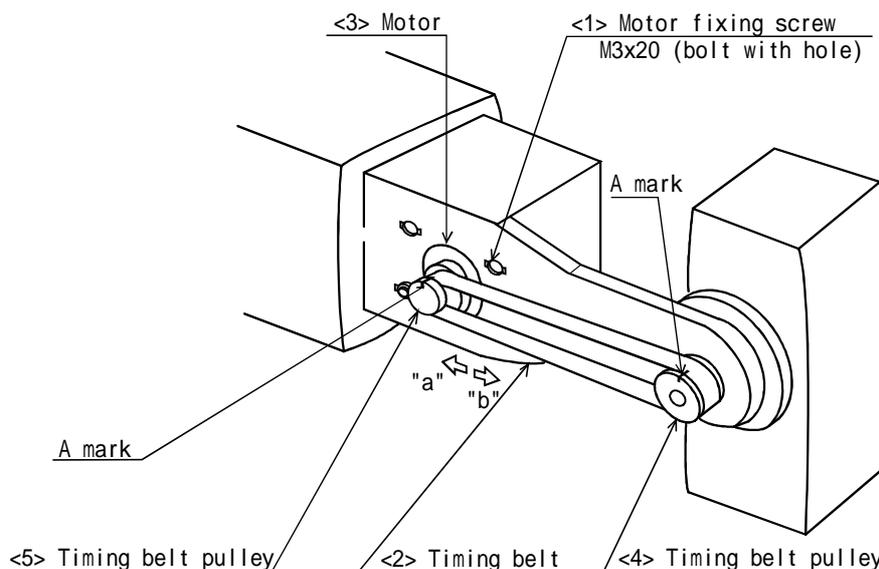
Inspection, maintenance and replacement of J5-axis timing belt
